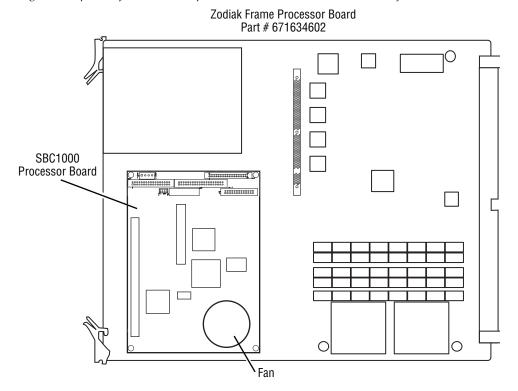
Top view of Zodiak Frame processor board with SBC1000 at lower left
